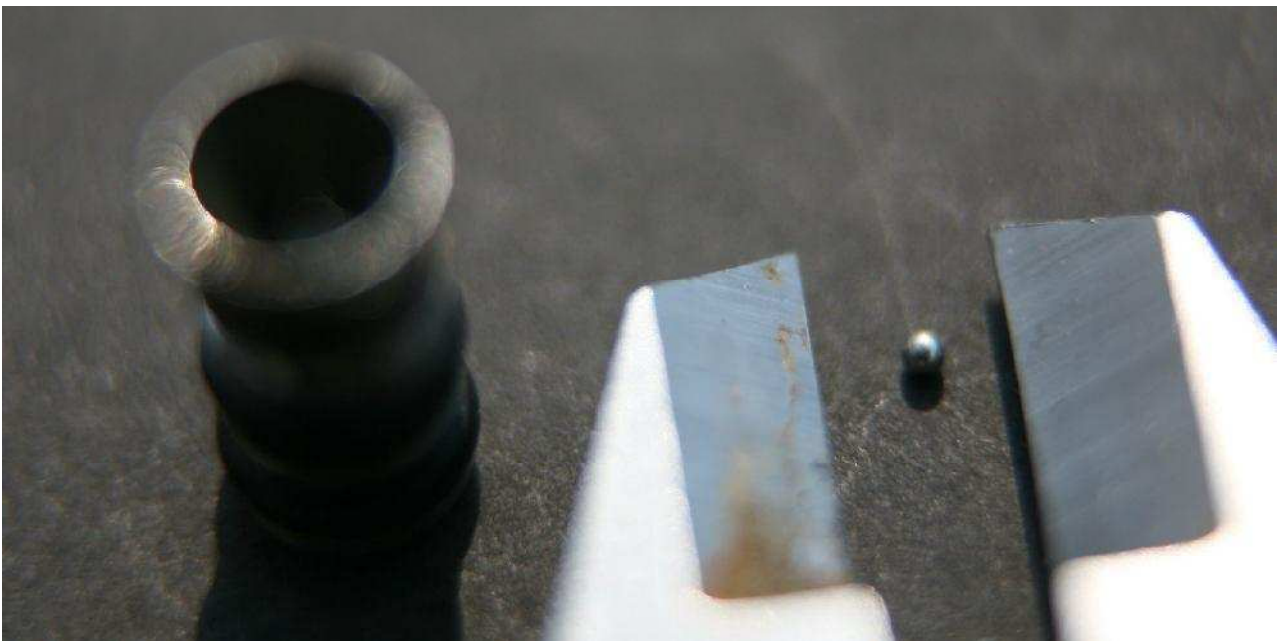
The edge of the bullet cutter was damaged on one side and showed two burrs.
